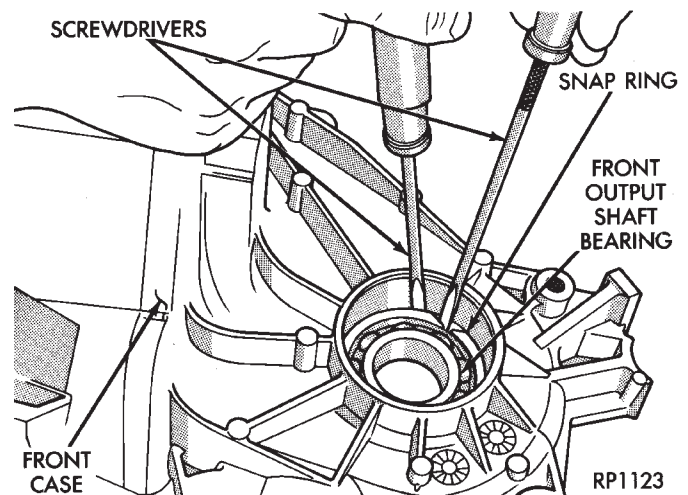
Removing/Installing Front Output Shaft Bearing Snap Ring
